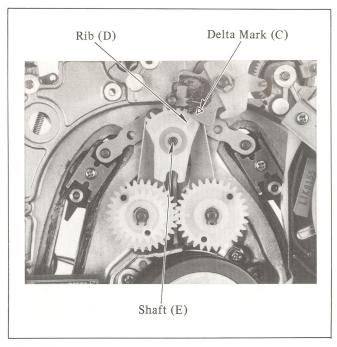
Assembly and Adjustment of Gears and Rods-(3)
